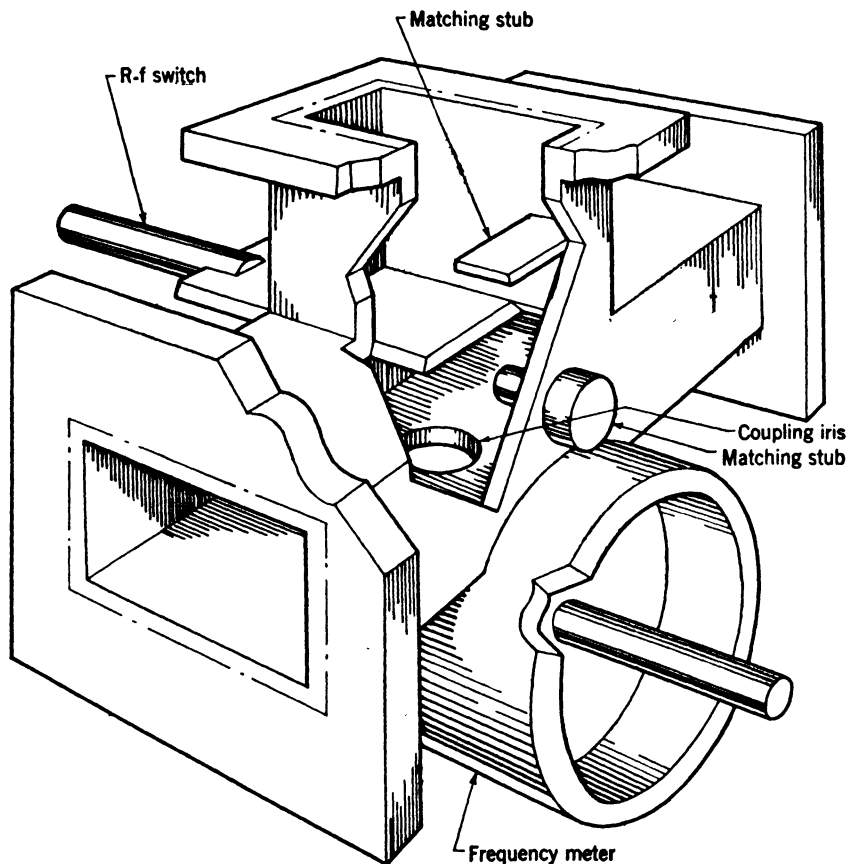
Schematic diagram of frequency-meter assembly.
